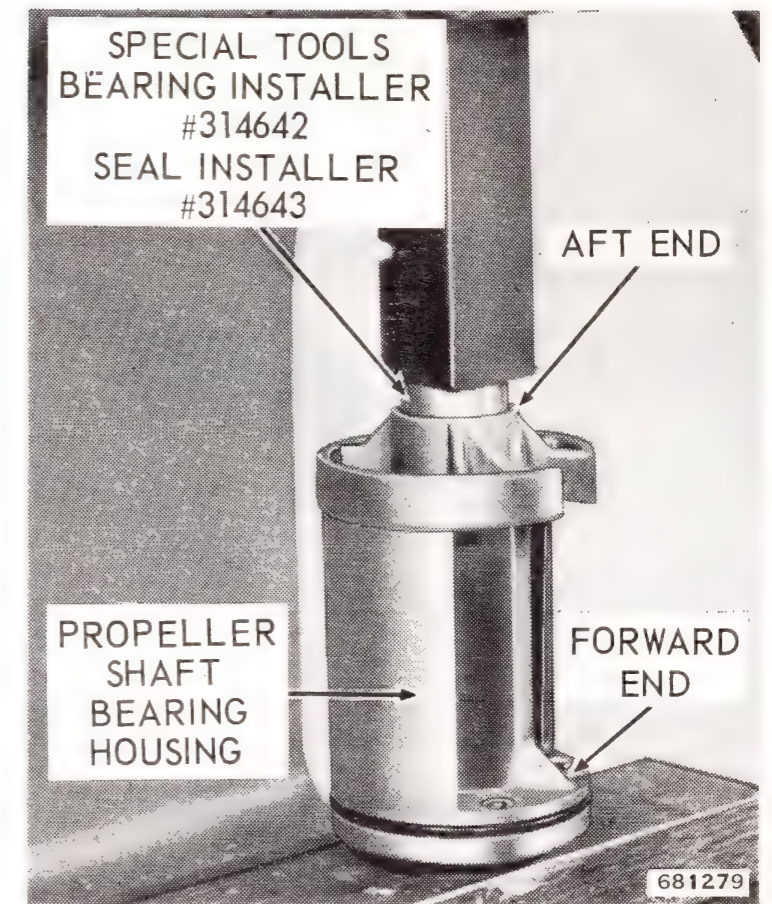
Installing Gearcase Head Aft Bearing and Seals
